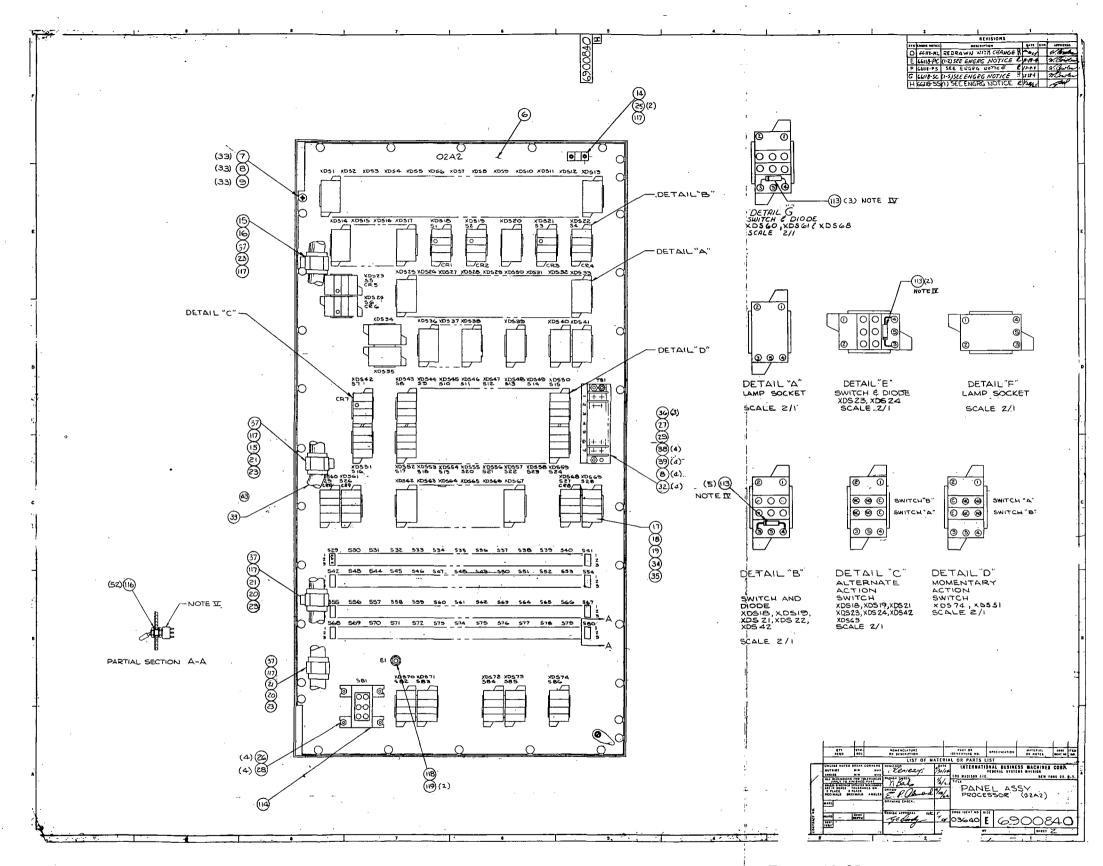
Processor Display Panel Assembly (02A2) Assembly Drawing (Sheet 2)
